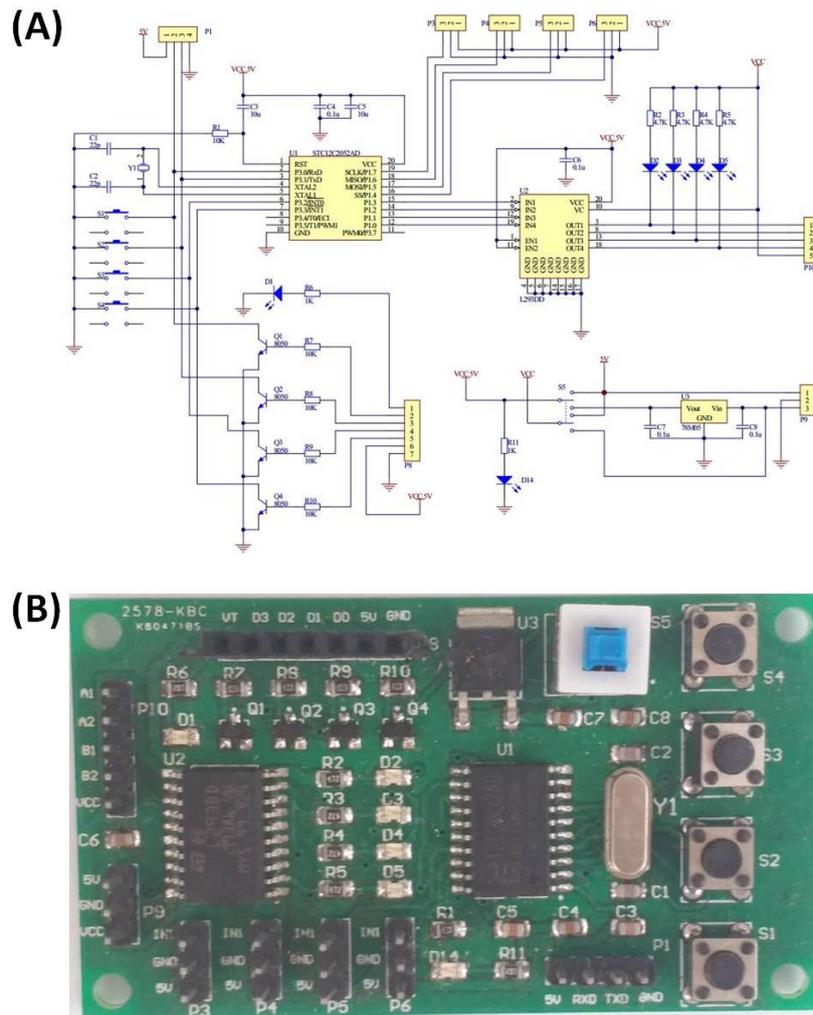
The circuit diagram (A) and the driver board (B) for stepper motors used in this work.
